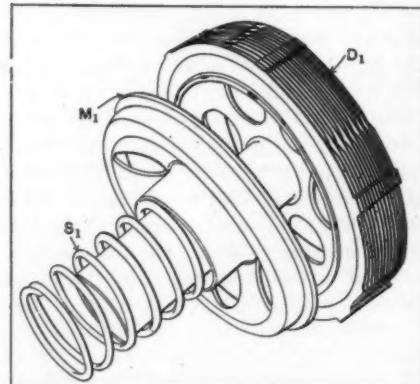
Multiple-disc clutch disassembled with the master plate backed off
